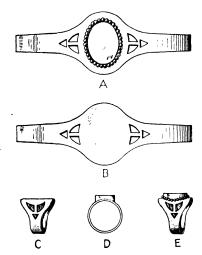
Steps in making a sheet-silver ring. A, paper pattern with design. B, blank sawed from sheet silver. C, blank sized and ends soldered together. D, bezel soldered in place. E, ornamentation soldered in place.
